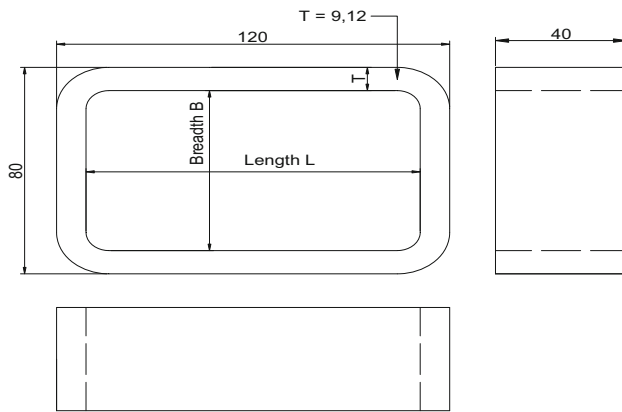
Drawing of selected specimen (Dimensions in mm)
